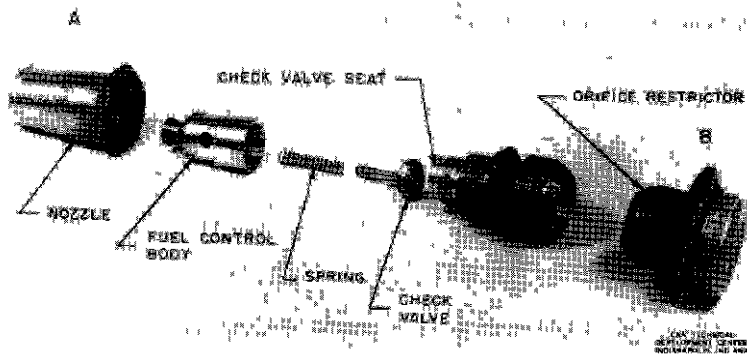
A Fuel Ingestion Nozzle Assembly and Orifice Restrictor, Exploded View
